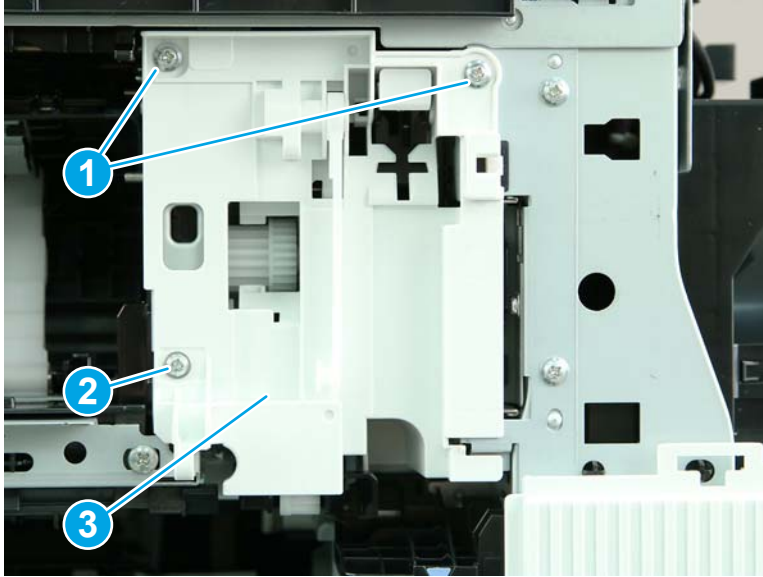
Remove two screws and toggle front assembly (M856/E85055/M776dn/M776z)
